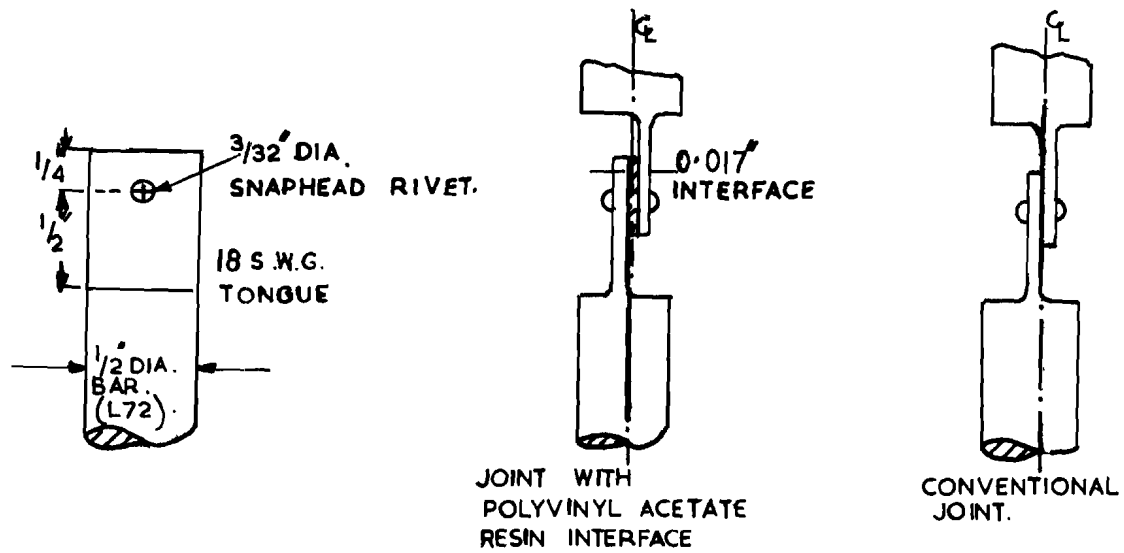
DETAILS OF JOINTS FOR DAMPING MEASUREMENTS.
